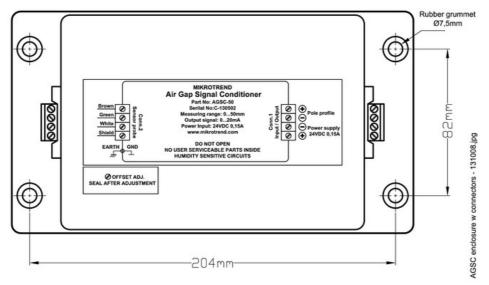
AGSC Signal Conditioner unit, sealed enclosure with connectors (CON), (mounting dimensions)
